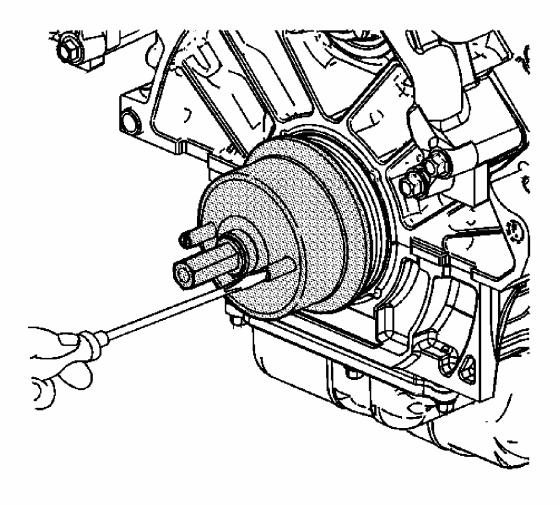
Checking Seal Installer Tightness Courtesy of GENERAL MOTORS CORP.
